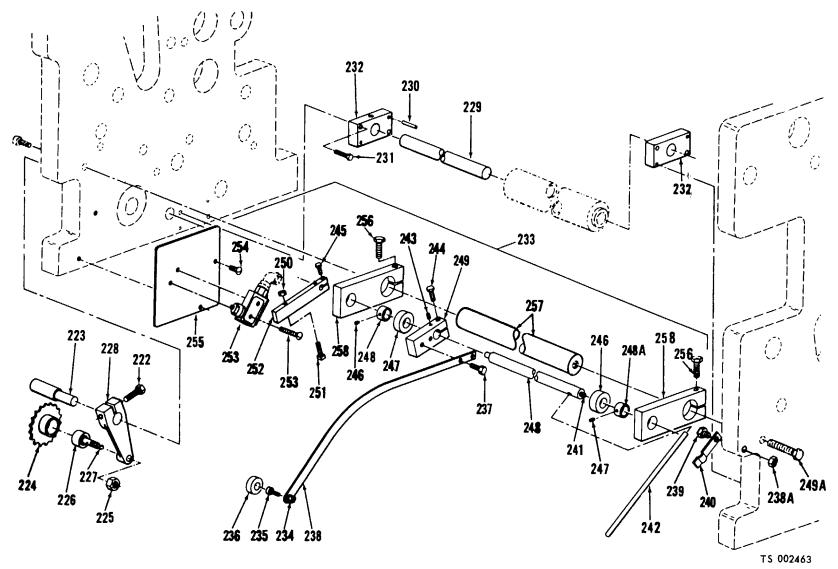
Feeder assembly (Sheet 1 of 5)
